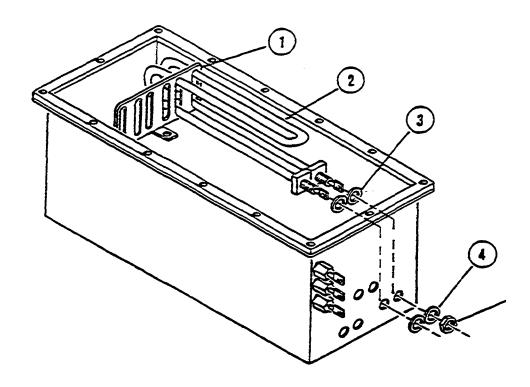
HEATING ELEMENT(S) ASSEMBLY
